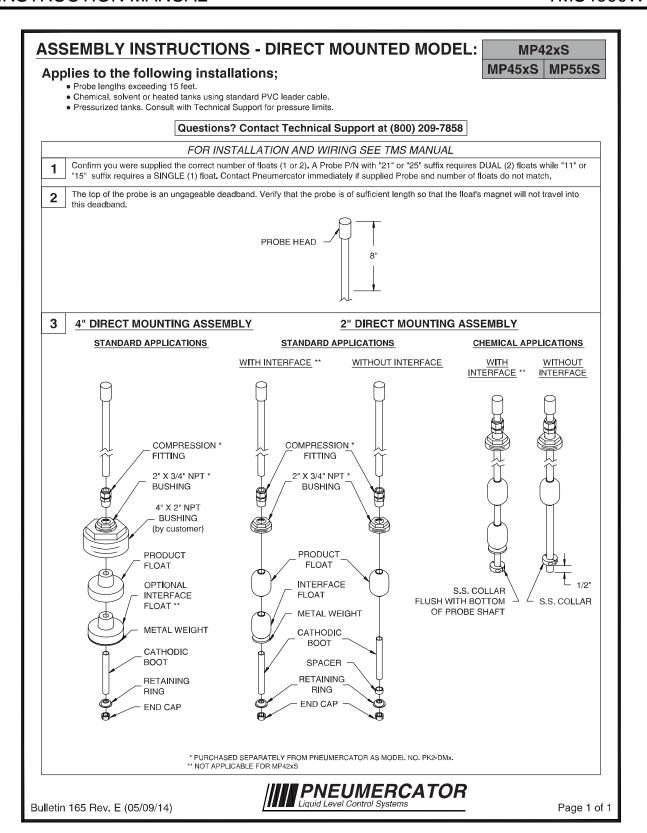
MP55xS Probe Assembly Instructions - Direct Mount
